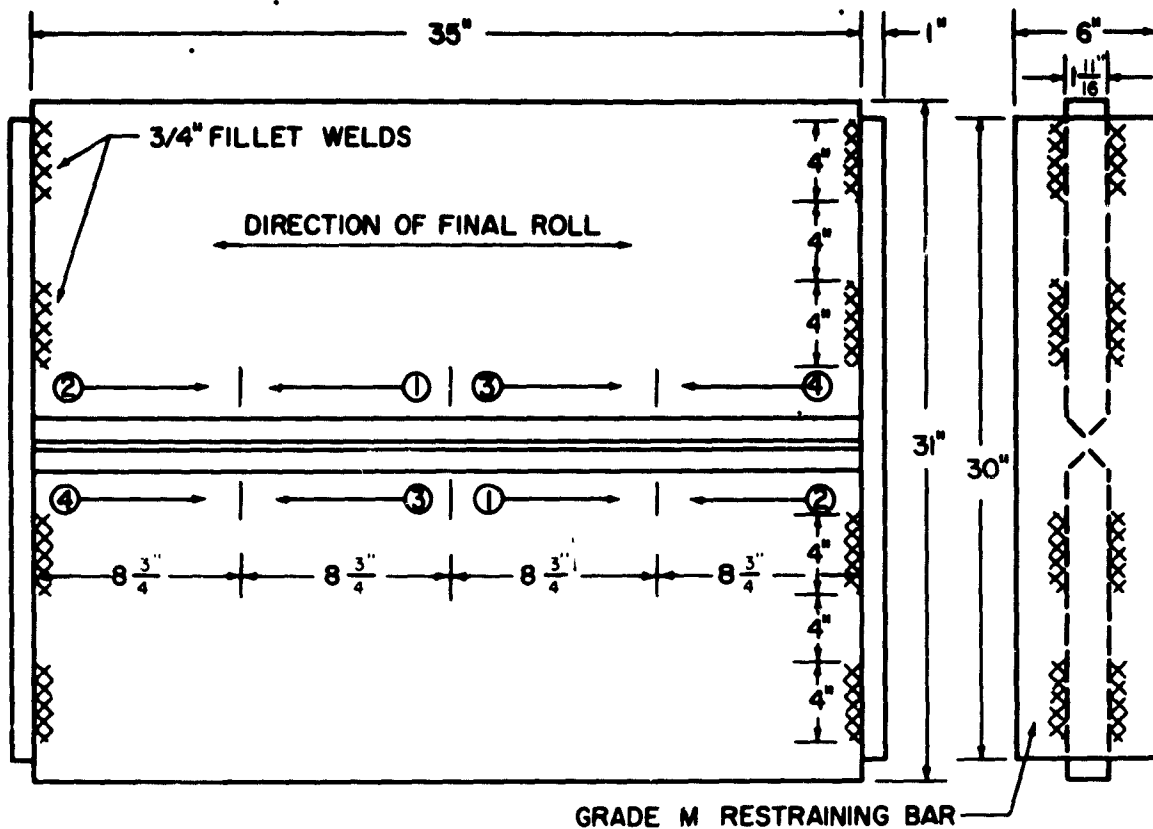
Typical Procedure For Welding Of HY-80 Plates
